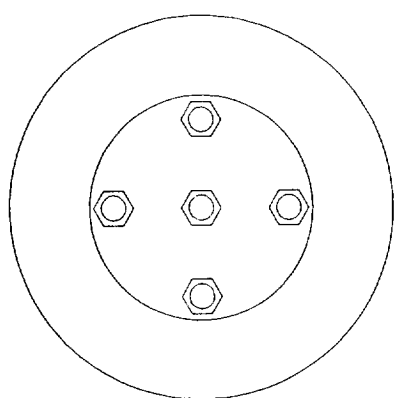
INITIAL DESIGN OF VACUUM CHAMBER ASSEMBLY
